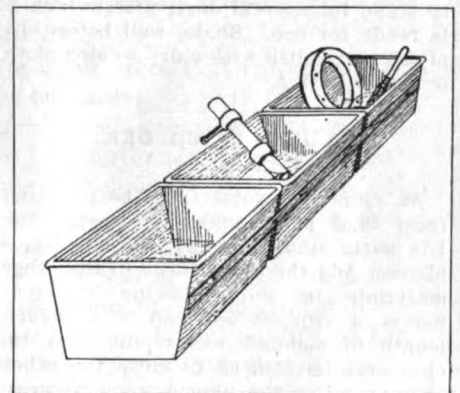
Home-Made Parts Holder for Use While Repairing or Overhauling Car.
